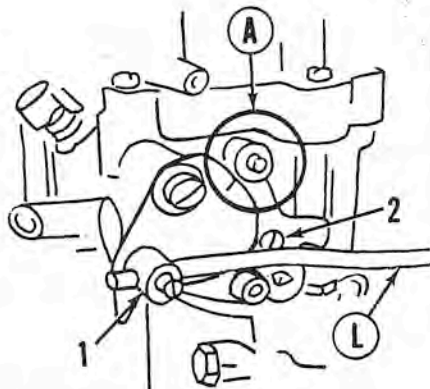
Loosen pivot clamp (1) and move cam and pivot on link (L) until scribe line is aligned with cam follower as shown at (A). Loosen screw (2) and move throttle shaft until cam follower just contacts cam and carburetor throttle valves are just ready to open. Refer to text.
